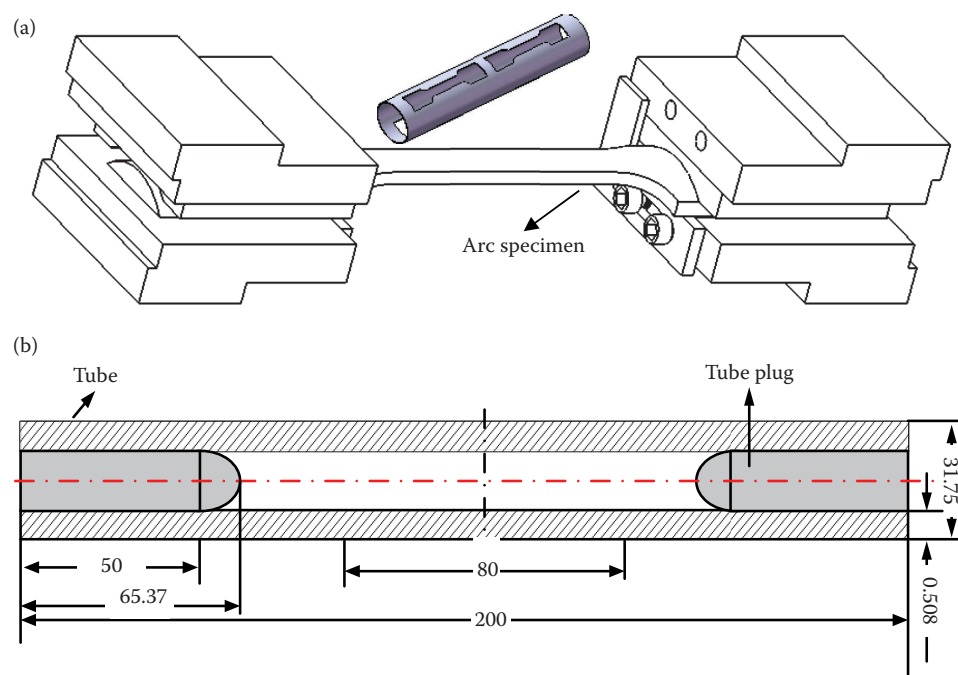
Specimen design of high-strength stainless steel tube (HSST) for uniaxial tensile test: (a) clamp die for curved specimen and (b) tubular specimen
